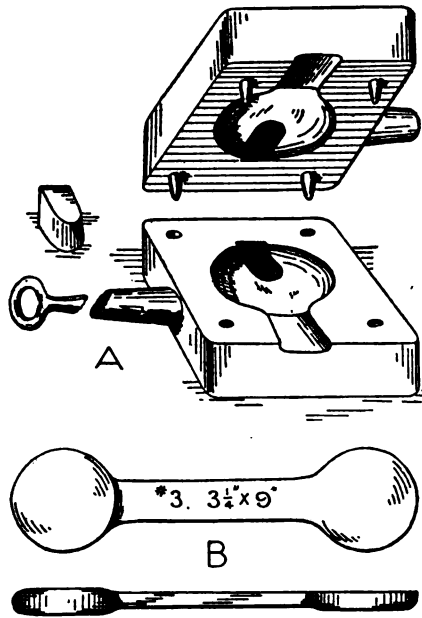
FORMER AND BLANK FOR WRENCH FORGING.
